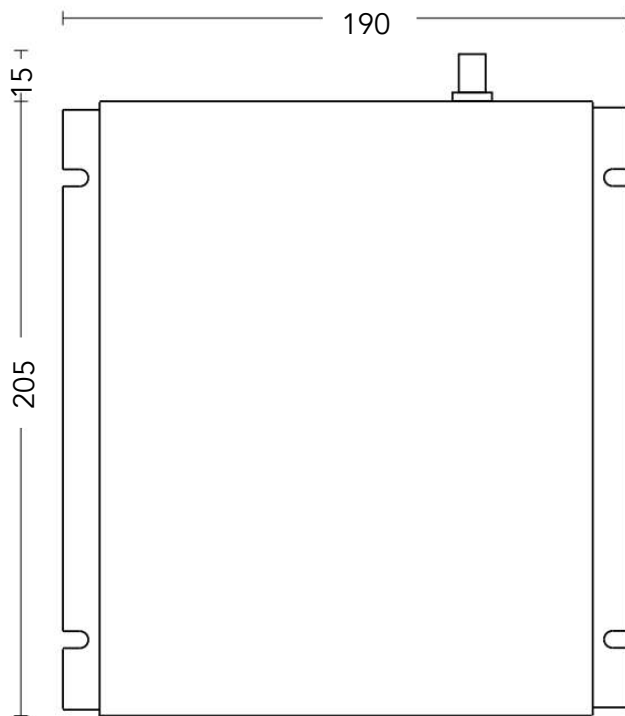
Dimensions of QuasarLR RFID Reader (in mm)
